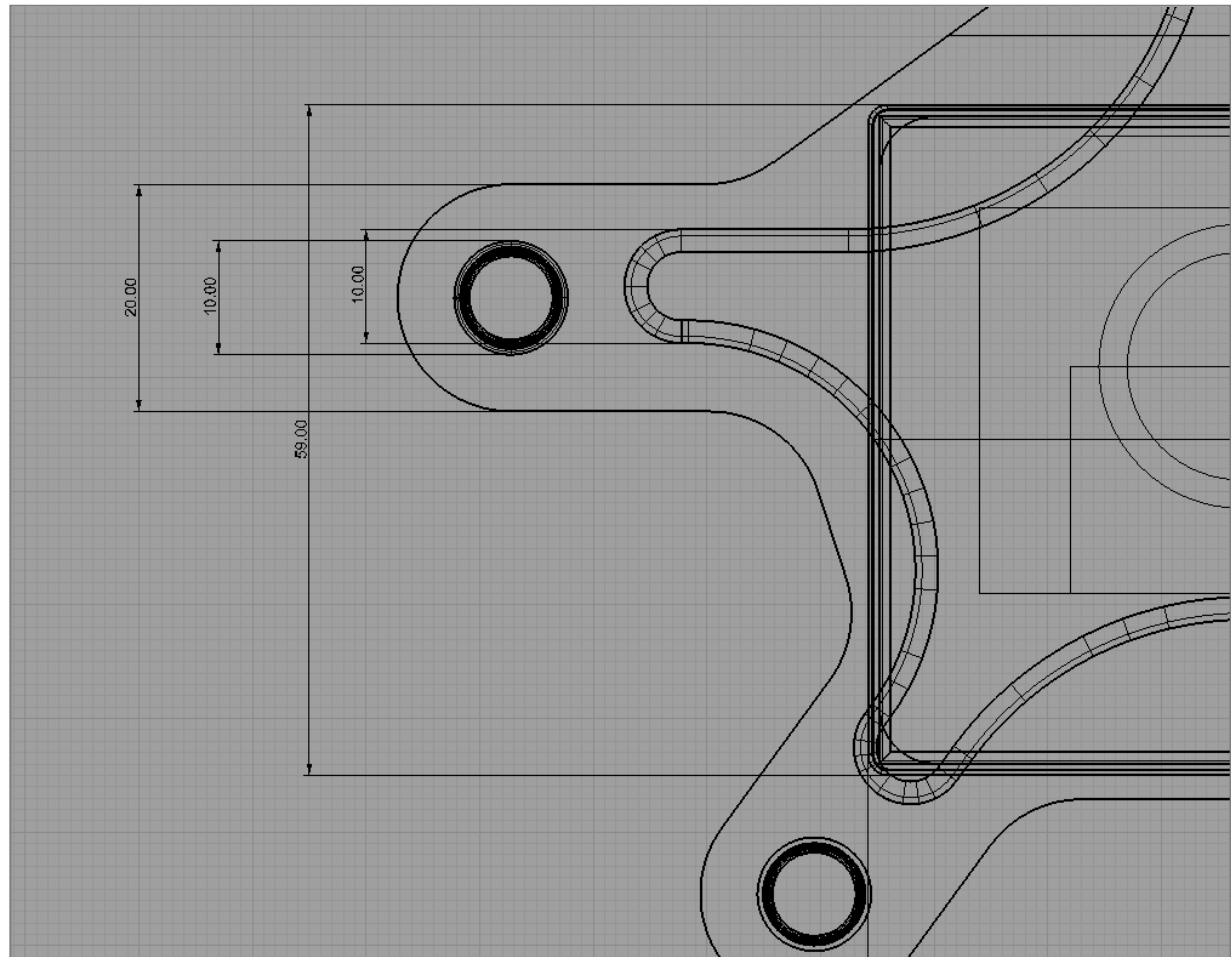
Final packaging detail keeping geometric constraints
